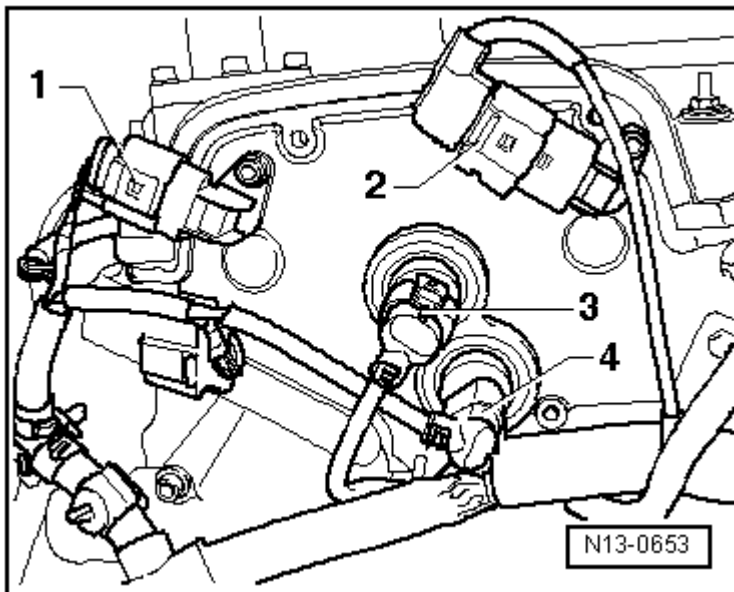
Identifying CMP Sensor G40, CMP Sensor 2 G163 And Connectors
